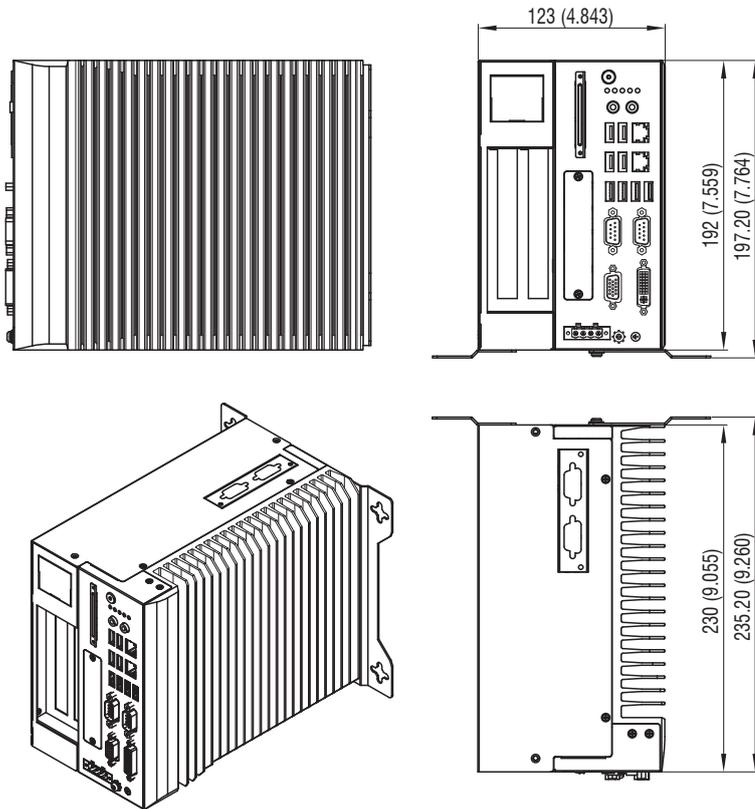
Dimensional drawing of Profile Unit Controller with mounting adapter, dimensions in mm (inches, rounded off)
